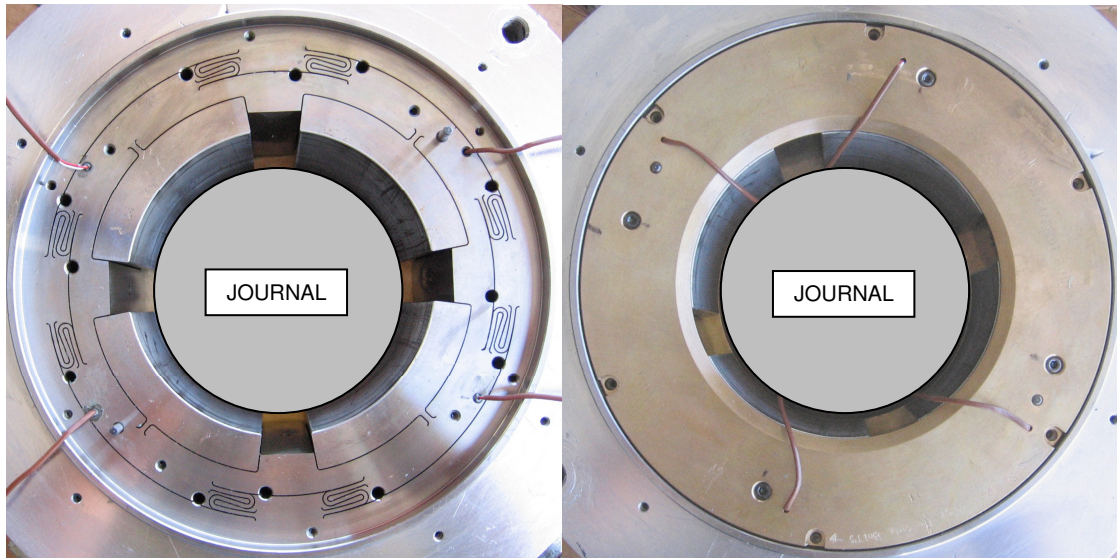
Flexure pivot pad bearing with integral squeeze film damper (test bearing) with seal removed for clarity (left) and with seal installed (right)
